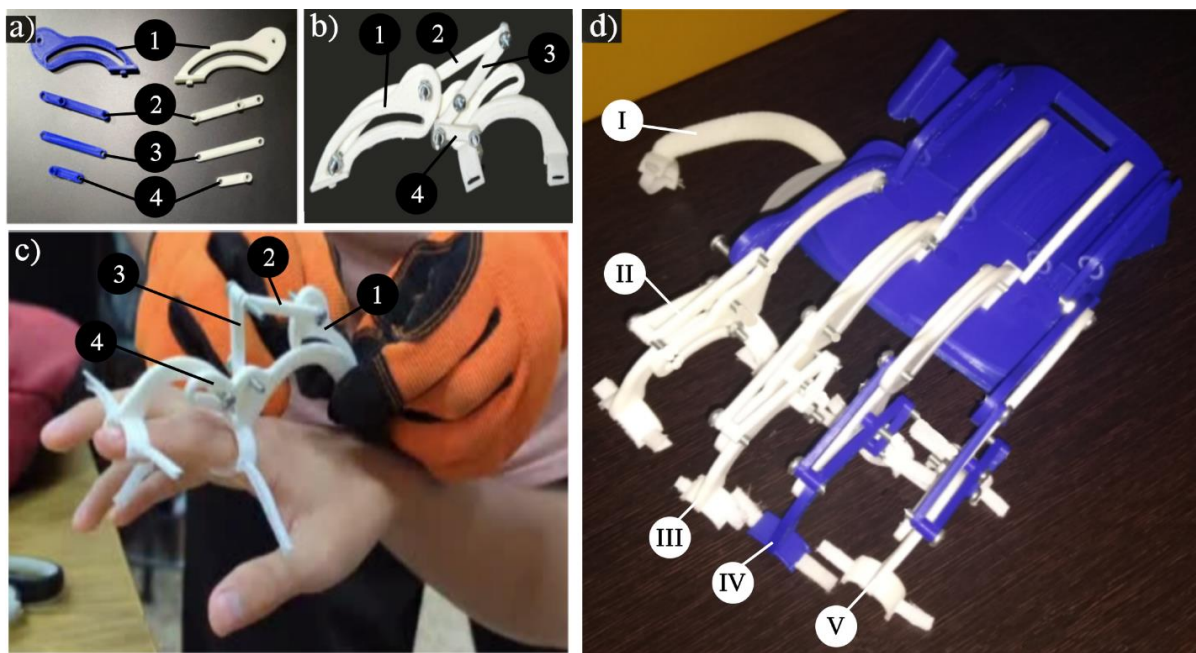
Mechanical prototyping phases: a) 3D-printed pieces, b) Assembly, c) Development of finger mechanisms, d) Partial exoskeleton Assembly
